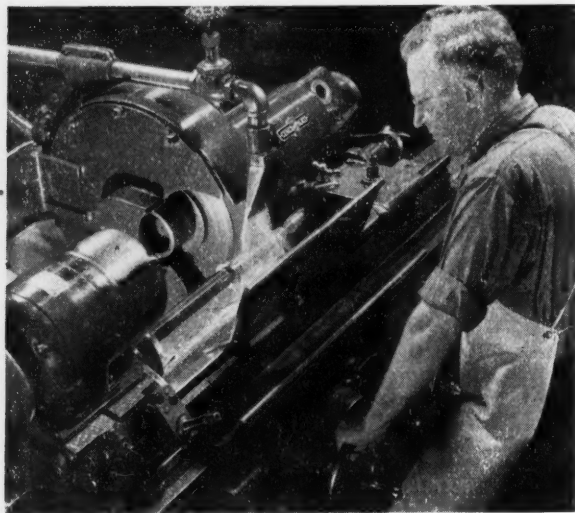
Grinding Three Diameters of an Acme Thread Adjusting Screw on a Cincinnati 6 x 18-In. Plain Hydraulic Grinding Machine.
